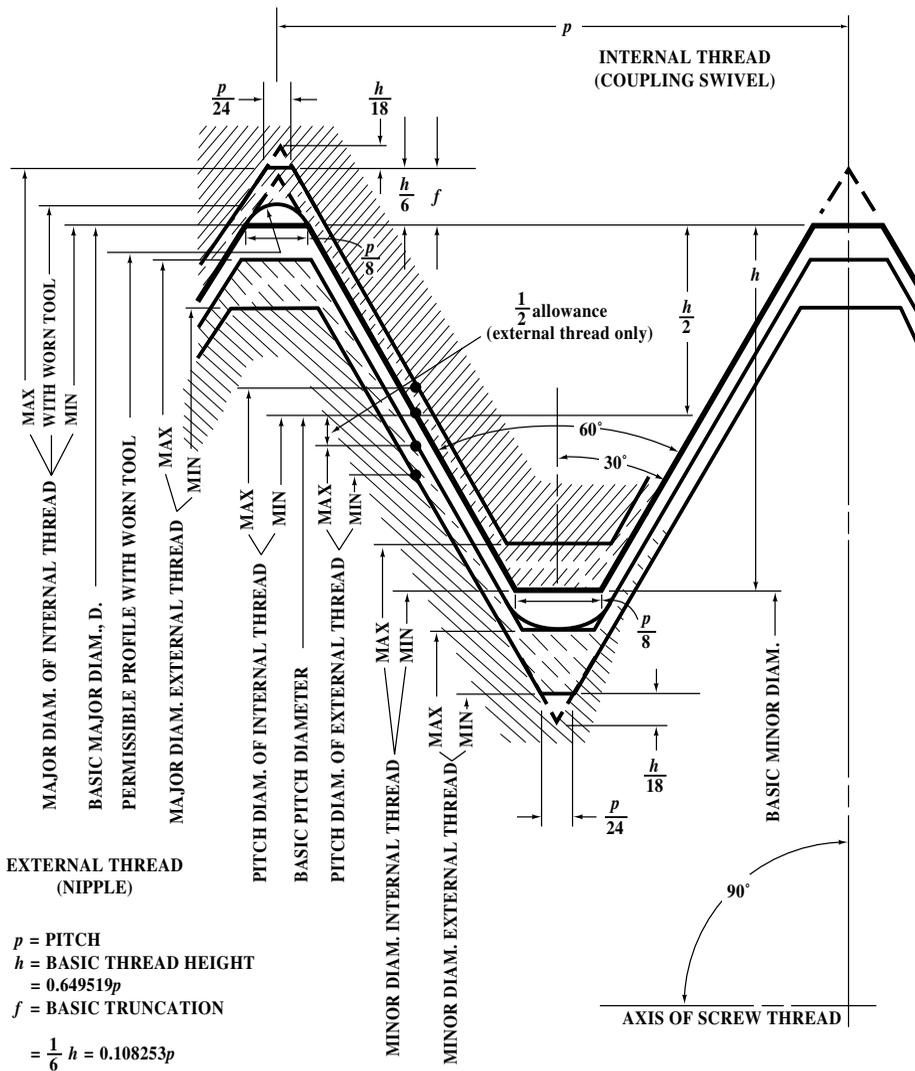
Thread Form for ANSI Standard Hose Coupling Threads, NPSH, NH, and NHR. Heavy Line Shows Basic Size.
